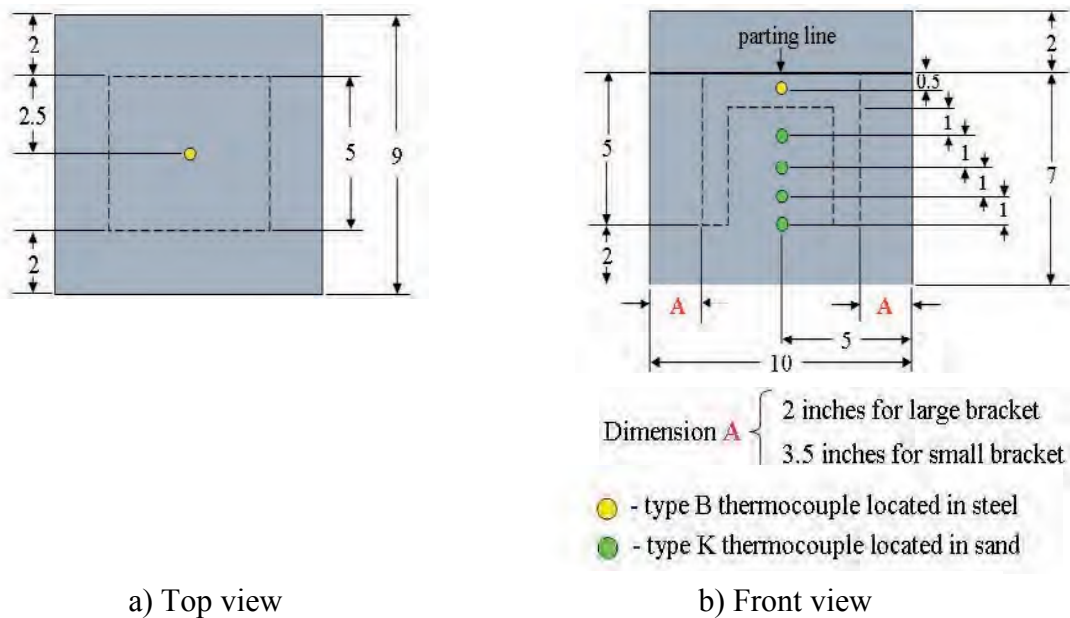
Mold dimensions and thermocouple placements. All units in inches.
